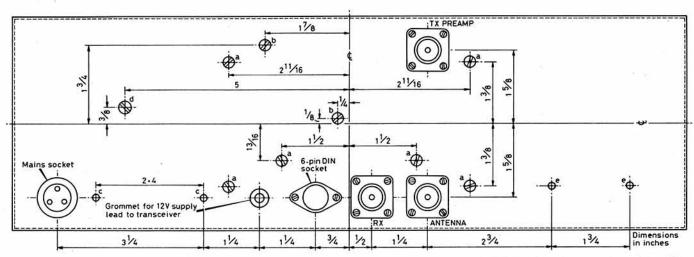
Rear panel layout. (a) 4BA or M3 screw for holding back to screen or to chassis. (b) 4BA or M3 screw for holding electrolytic capacitors, C13 and C14. (c) 6BA screw holding bracket on which PCB5 is mounted. (d) Bolt holding T1 (0·203in dia hole). (e) 6BA screw for holding standoff insulator (and RFC1). (f) Grommet for output lead from the 12V supply (0·25in dia hole)
